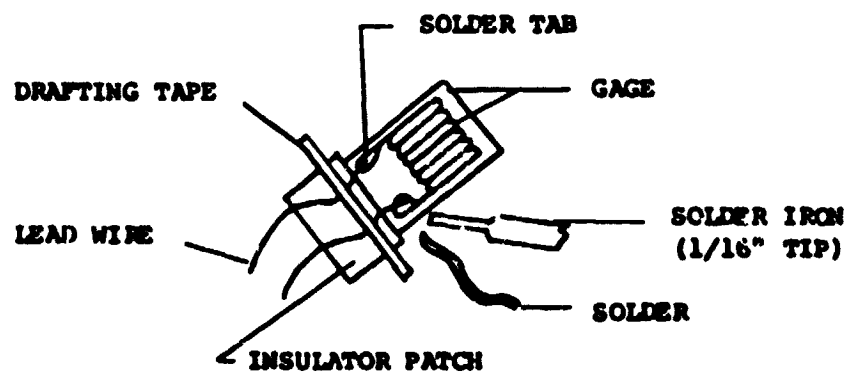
ATTACHMENT OF LEAD WIRES TO SOLDER TABS OF GAGE
